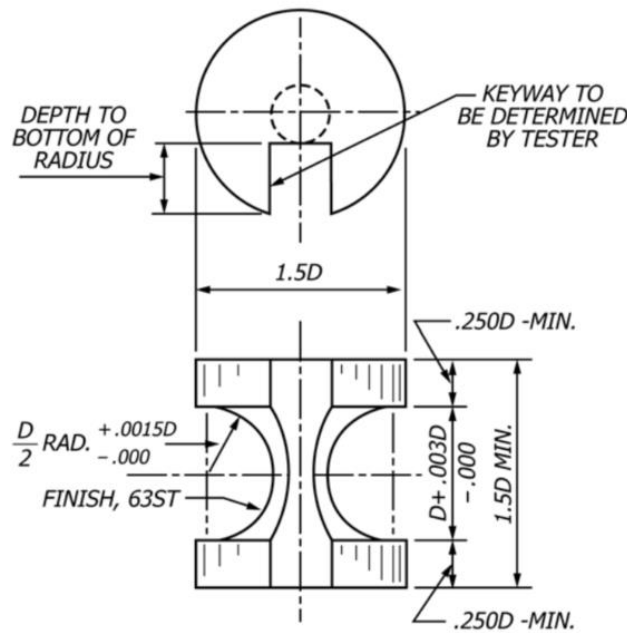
Specified Dimensions for “Anvil” Supports (ASTM Committee D20, 2014)
